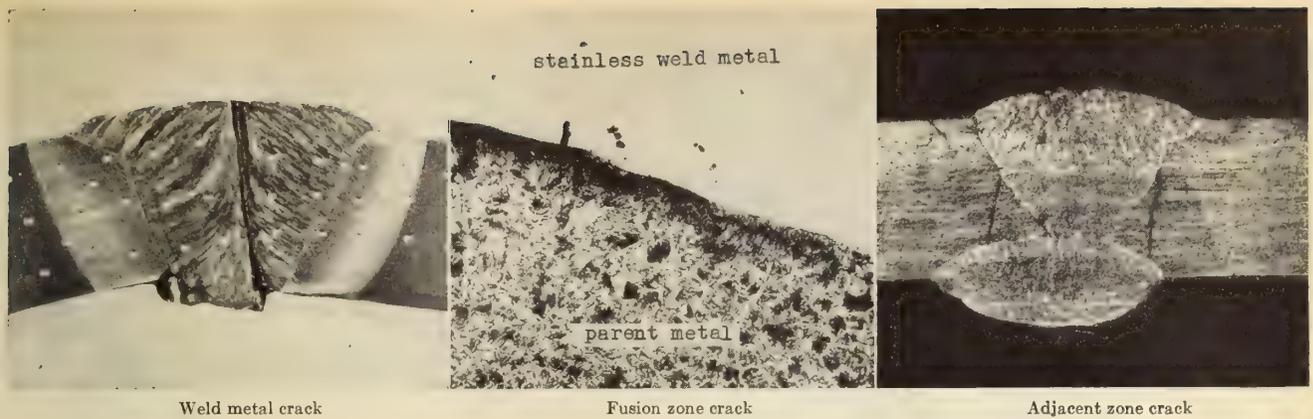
Three main types of weld section cracks—All samples etched with 3% nitric acid.
